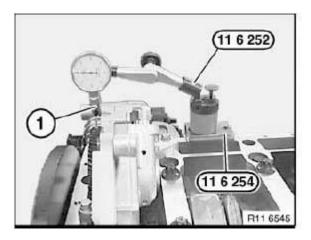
Identifying Special Tool 11 6 252 And 11 6 254 Courtesy of BMW OF NORTH AMERICA, INC.
